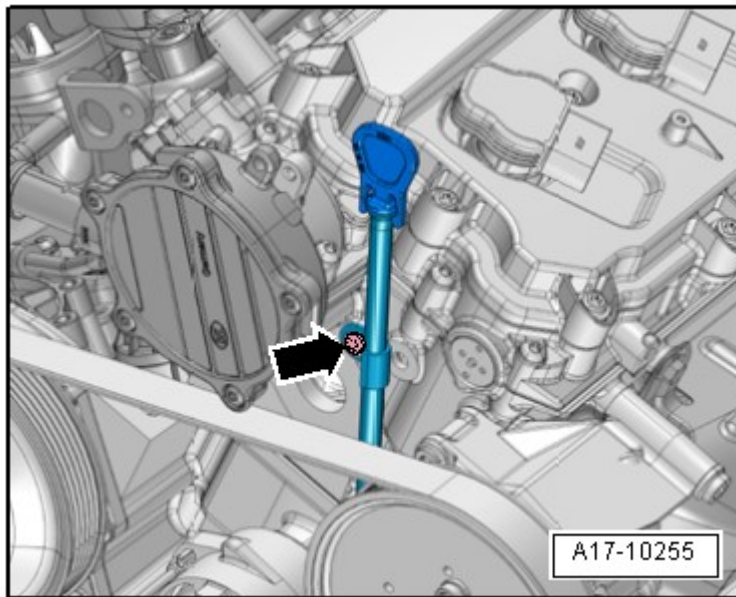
Identifying Oil Dipstick Guide Tube Bolt
